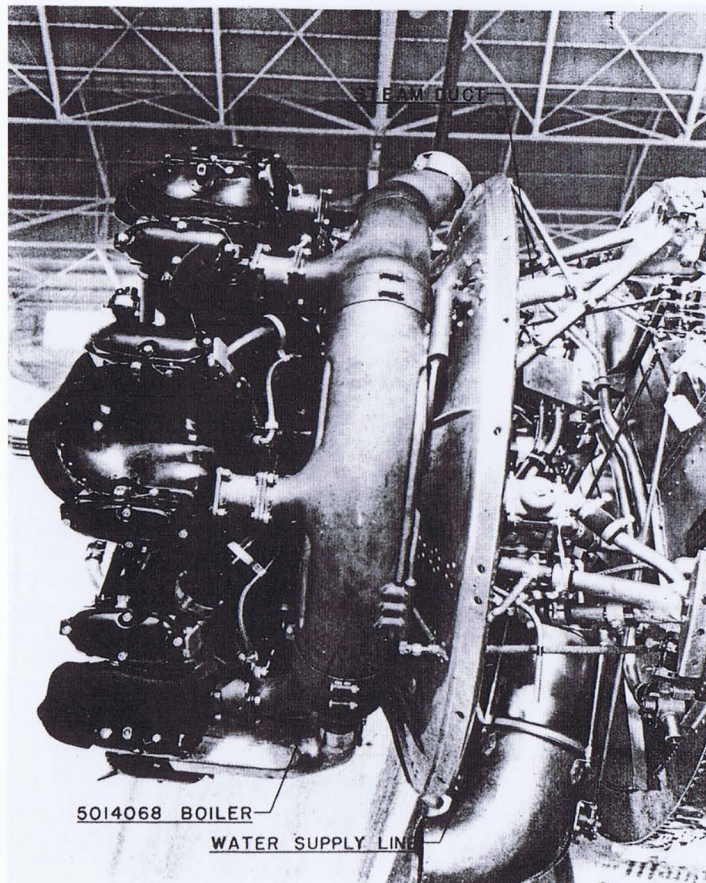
BOILER INSTALLED IN ENGINE SECTION
